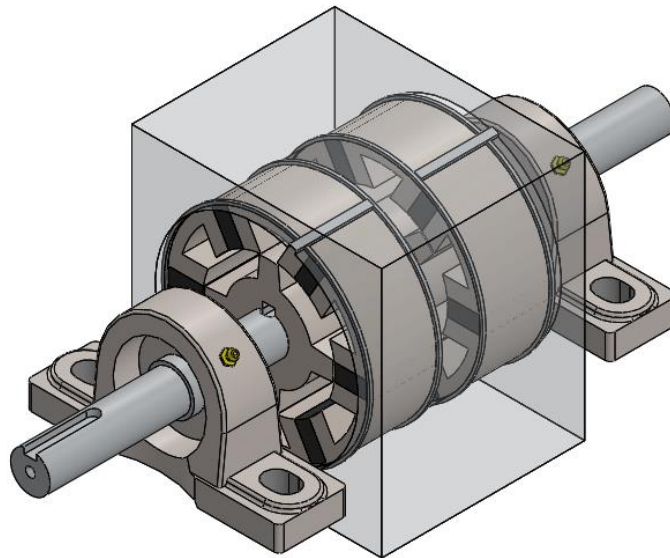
Assembling drawings of the proof-of-concept dual-stator 6/4 FSPM machine with housing and pillow block bearings in CAD program.
